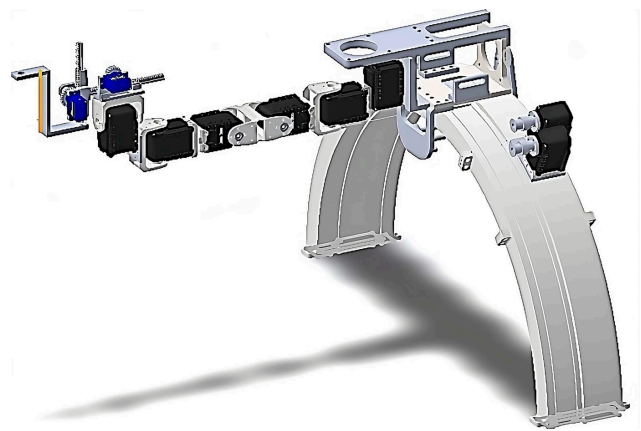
Isometric view of the fully assembled robotic manipulator CAD model.
